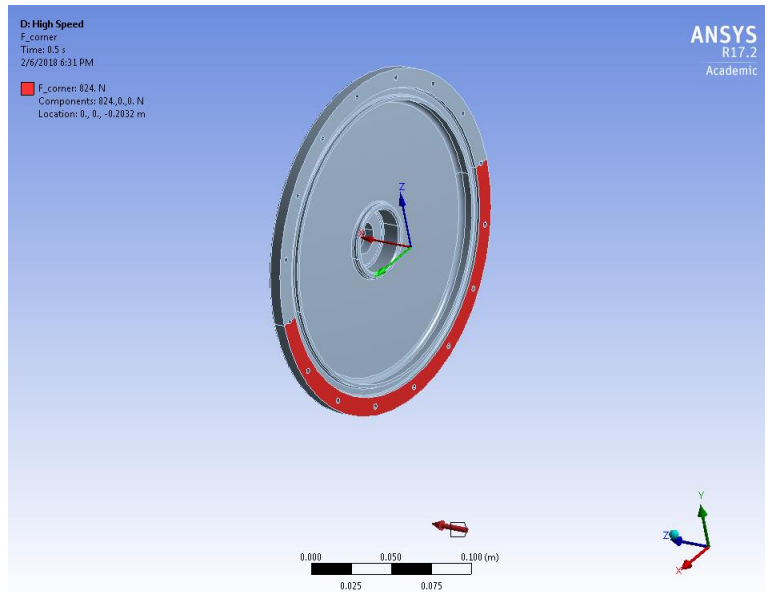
Corner loading - front endcap surfaces (rear endcap similar)
